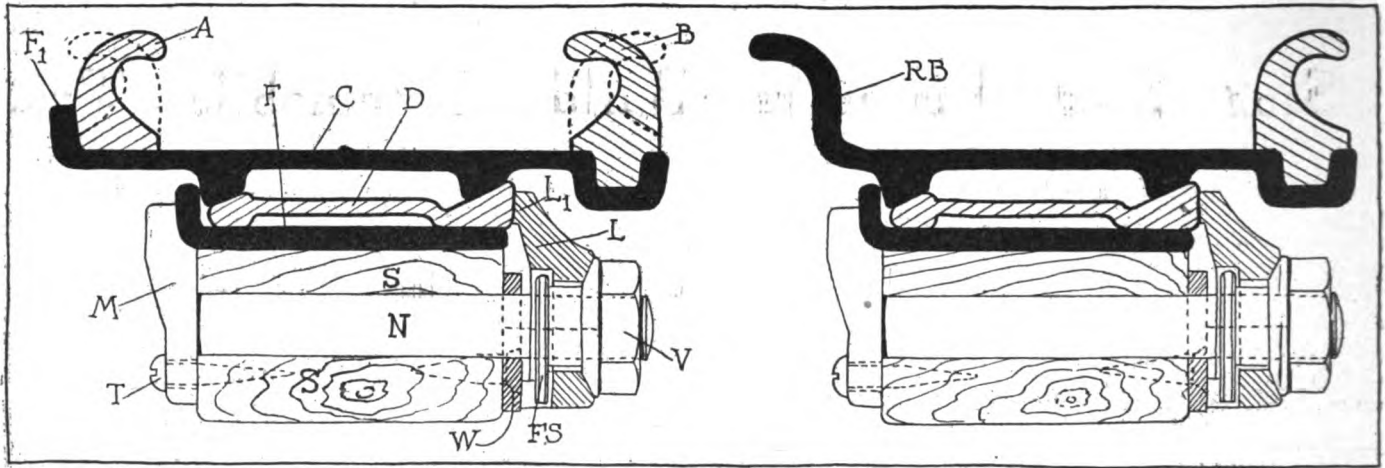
Stanweld universal quick detachable demountable rim. Fig. 8—Quick detachable demountable rim for straight-side tires
